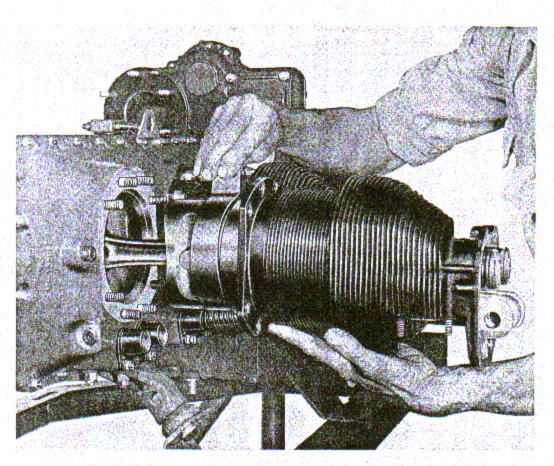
Installing Cylinder and Valve Assembly Alone
